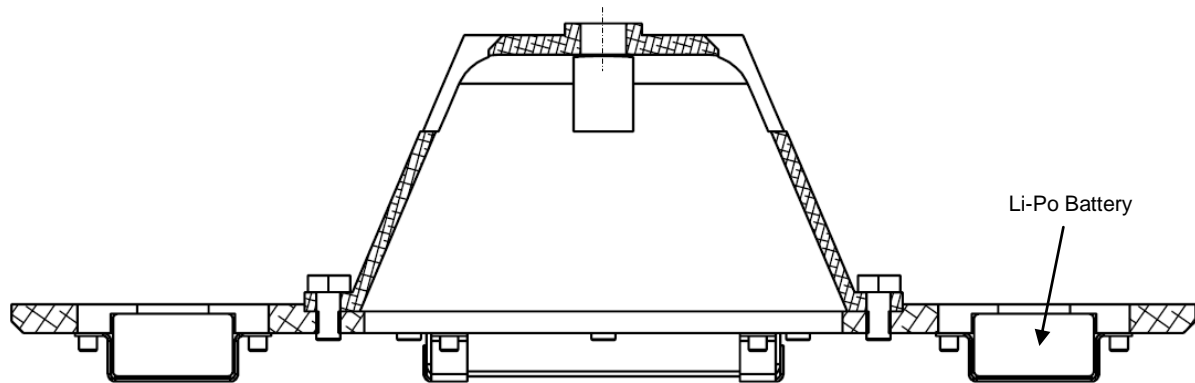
Section of disc assembly showing battery location and central cone cross section geometry
